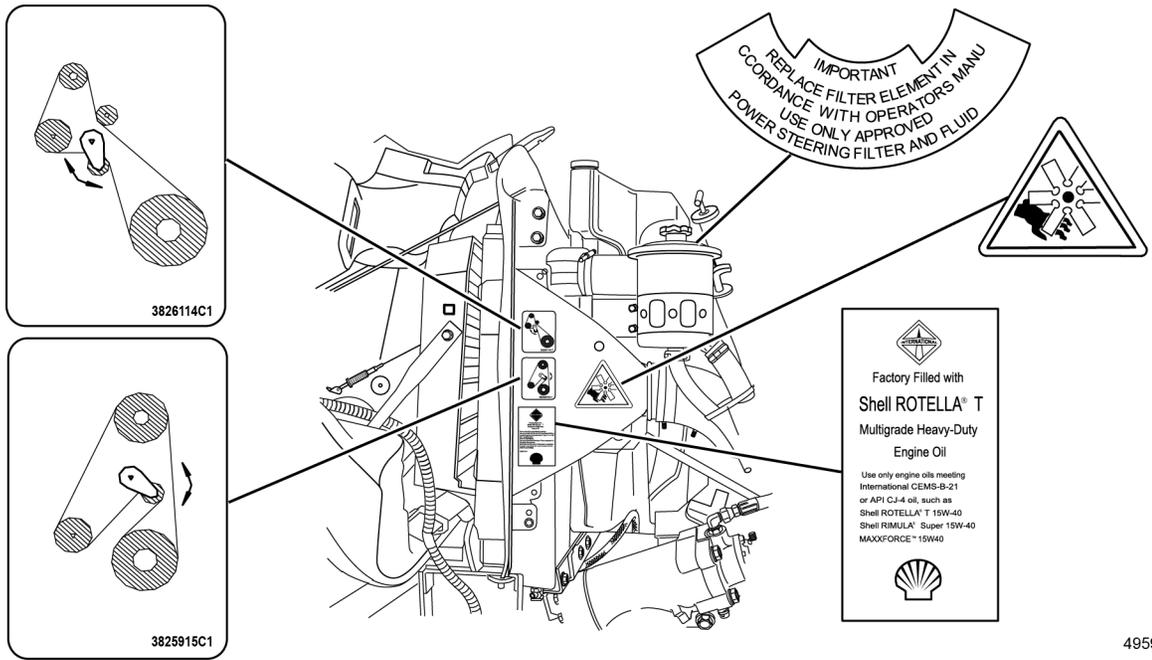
Driver Side Fan Belt and Engine Oil Decal.
